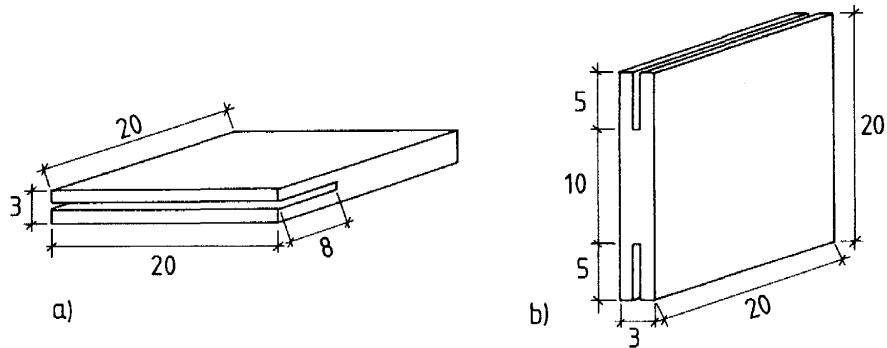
Geometry of specimens. a) Tension specimen b) Shear specimen
